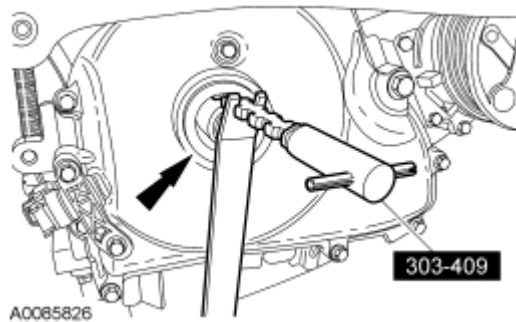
Locating Crankshaft Front Oil Seal And Special Tool (303-409)
